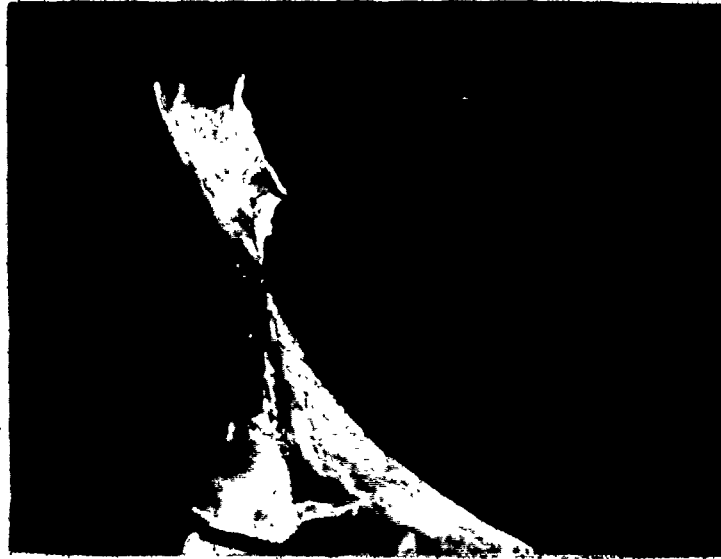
Fracture surface of K7H carbide grade tool used for machining 4340 steel (217 BHN), (X20).
